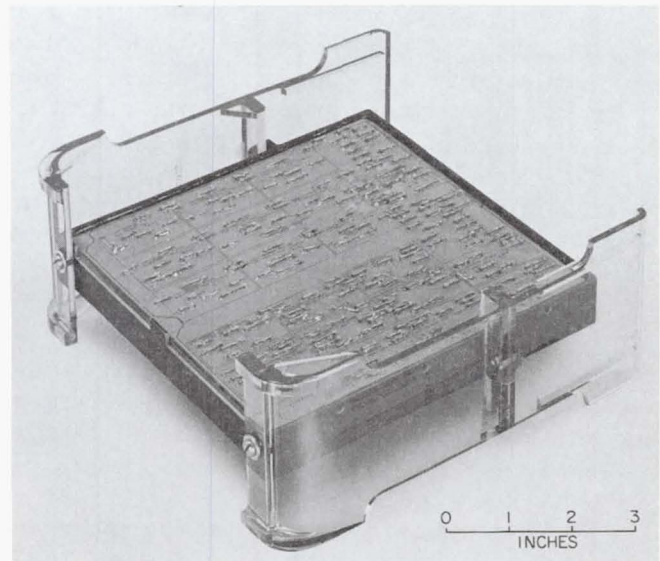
Welded prototype (PHA) decoder assembly - with module leads interconnected to external matrix conductors
